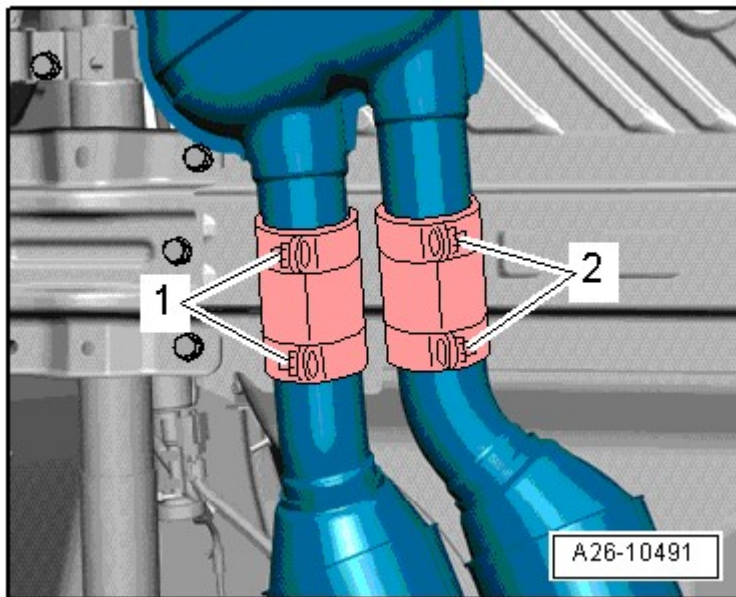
Identifying Clamping Sleeves -1 And 2-
